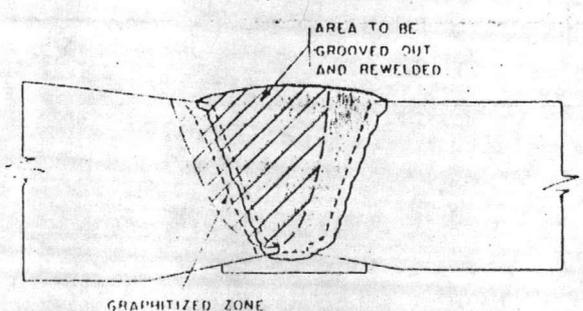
Sketch illustrating procedure for partial grooving out and rewelding of joint with graphitization on one side of the weld
